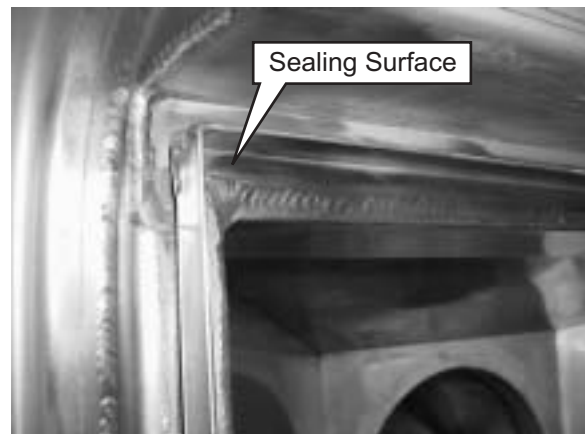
Gel Seal Commercial Housing Filter Sealing Surface
